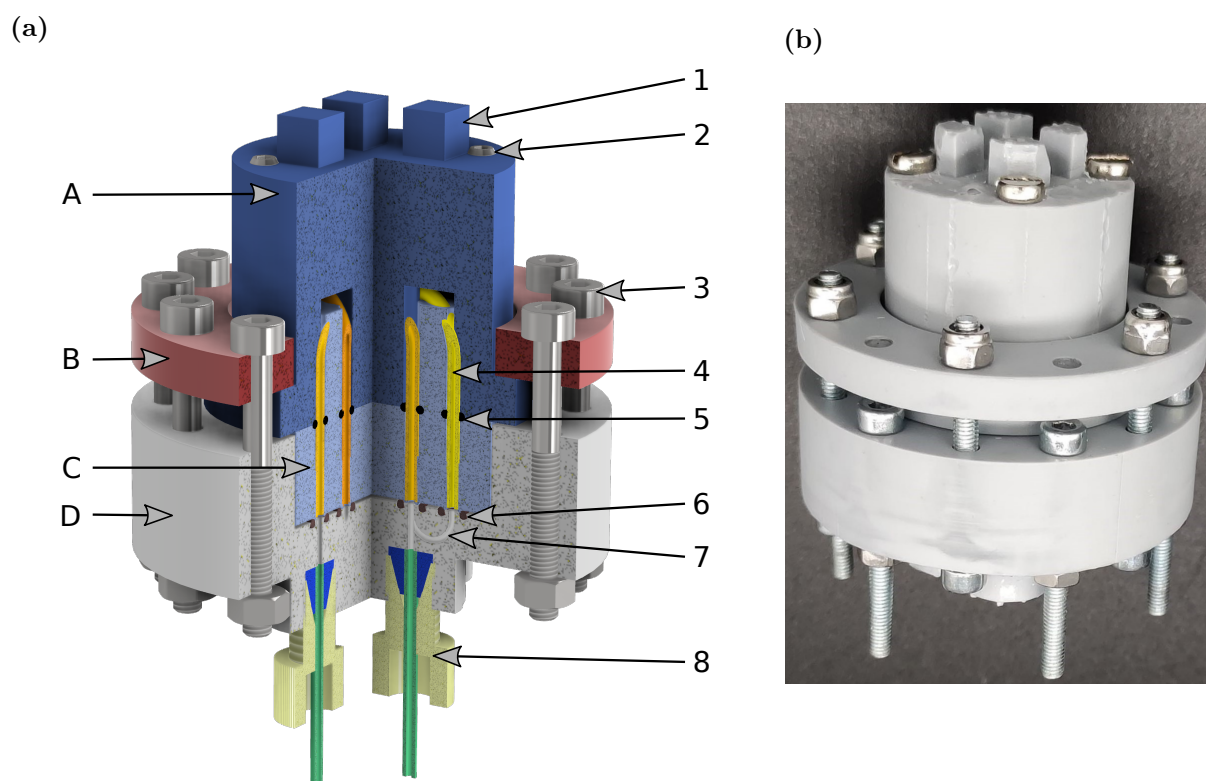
(a) Section view of the assembled valve system CAD: A – Rotor part 2 (dark blue); B – cover (red); C – rotor part 1 (light blue); D – stator (gray); 1 – adapter for motor coupling; 2 – screw for joining the two rotor parts; 3 – screw for axial compression of rotor and stator; 4 – capillary chromatography column (different shades of yellow/orange indicate the three different visible columns); 5 – O-ring to prevent fluid bypass around the columns; 6 – O-rings sealing the rotor-stator interface; 7 – connection channels in the stator; 8 – fluidic connection (in/outlet) to the stator. (b) Assembled 3D-printed valve system.
